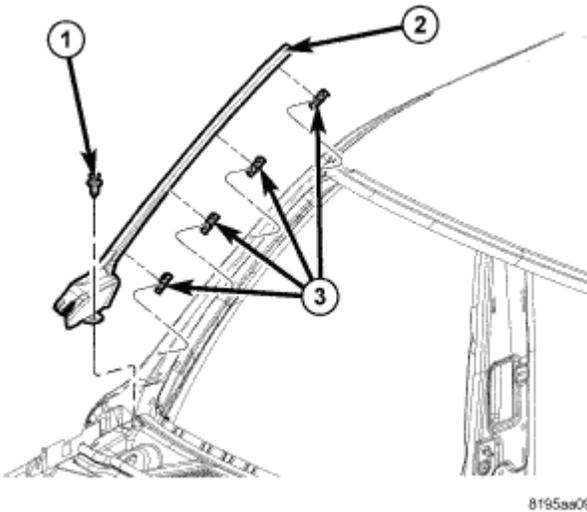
Push Pin, Windshield A-Pillar Molding & Clips
